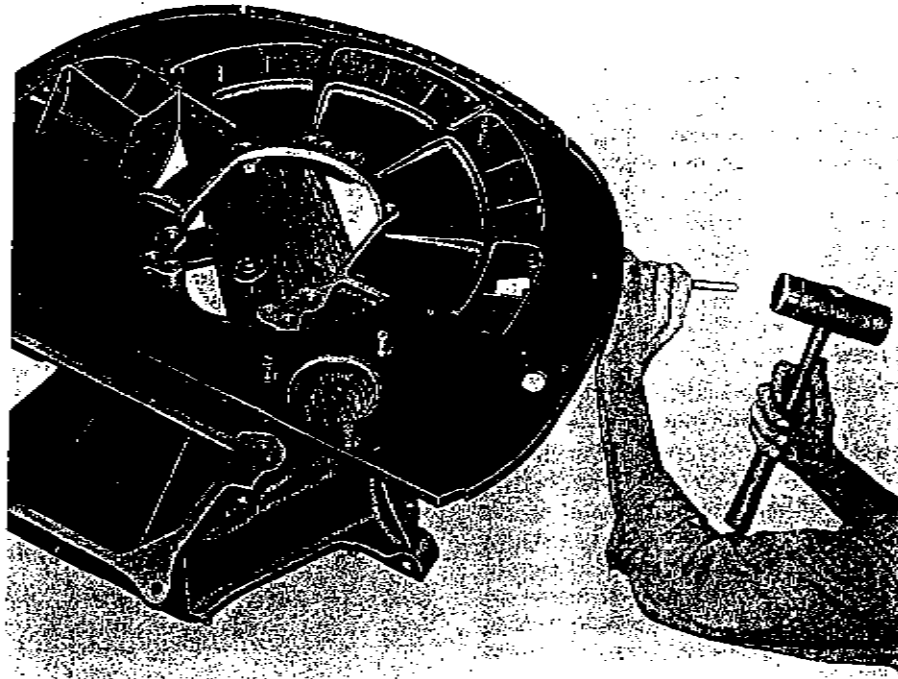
Aligning Screw Holes and Punching Sealing Strip
